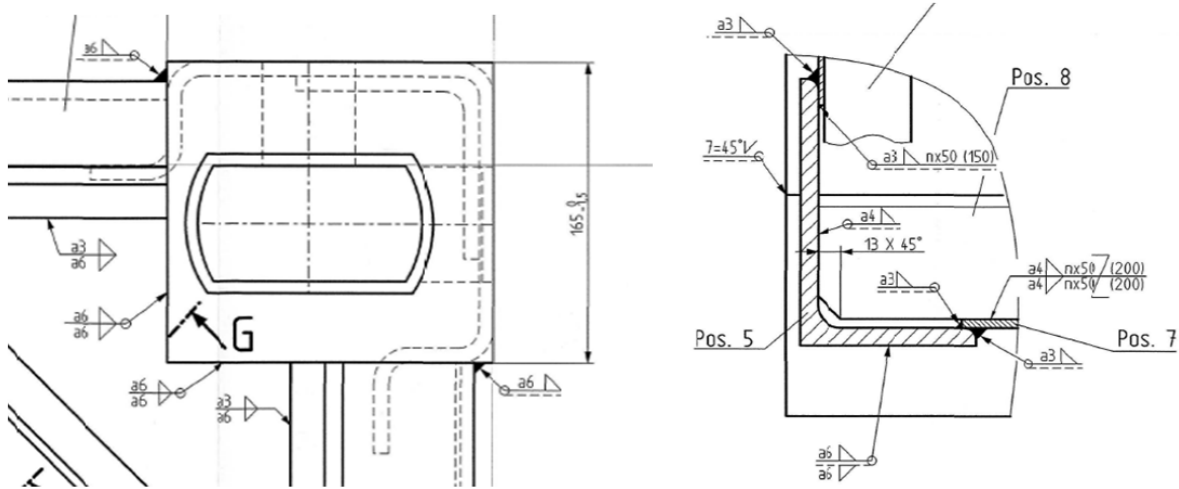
Welded connections around (a) twistlock fittings and (b) side and base stiffeners.
